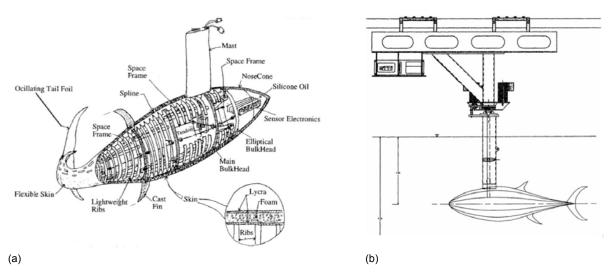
RoboTuna inside (a) and sideview of carriage mount (b). Reproduced from SW Tolkoff, 1999[21]
